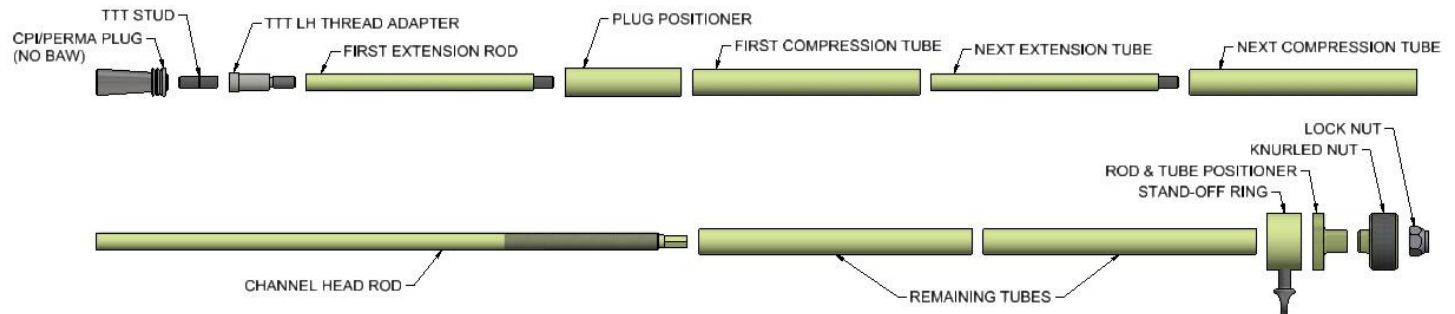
PULL ROD ASSEMBLY SET-UP
